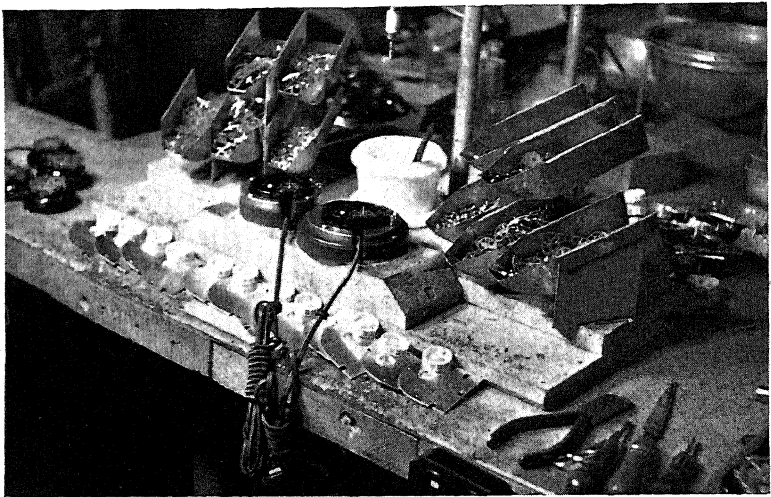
Typical two-handed setup for electric-clock motor assembly.
